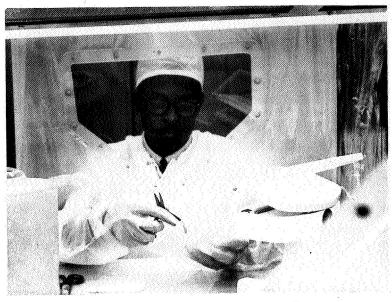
Technician Inserting Cleaned Tool into Plastic Envelope
